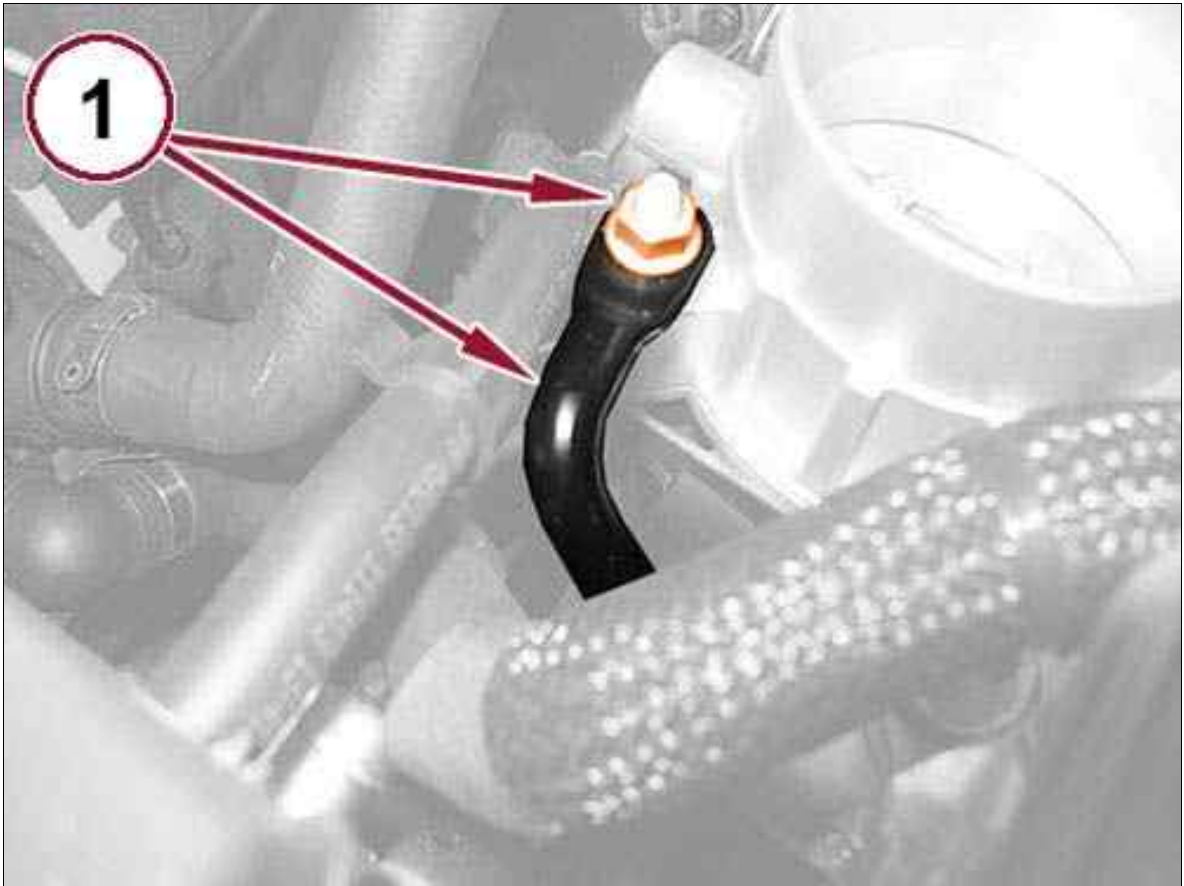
Exhaust Manifold Catalyst, Nuts & Bolts
